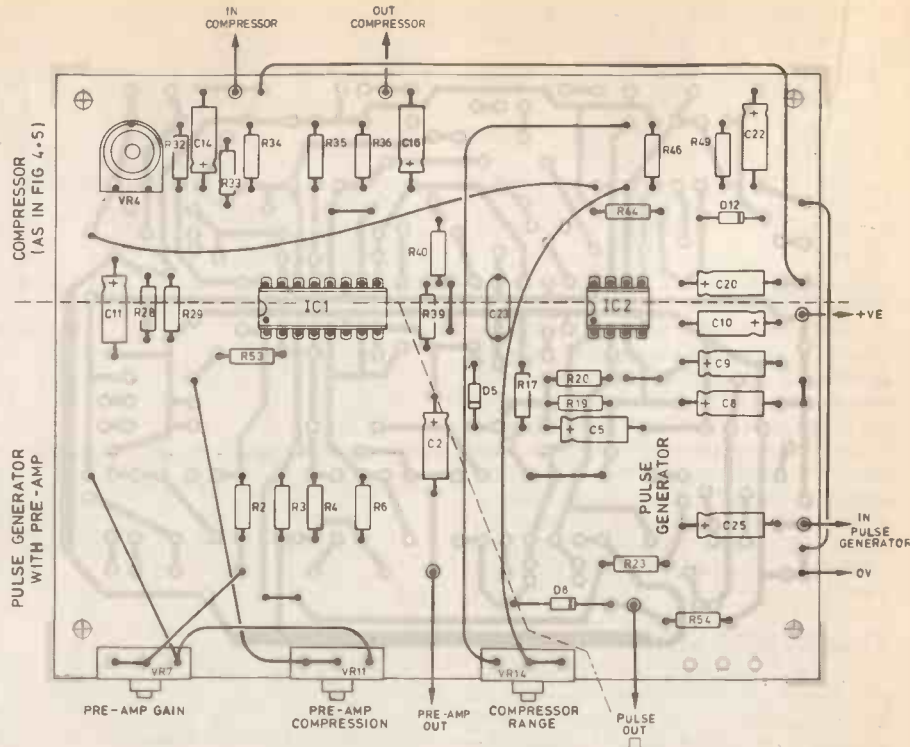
6. Pulse Generator and Compressor component layout on the master printed circuit board. —Plan F.
